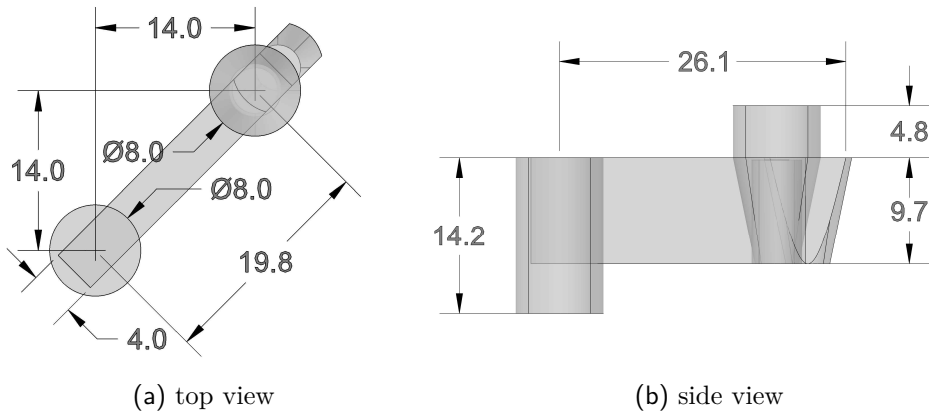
Drawing of interconnecting part, dimensions in mm
